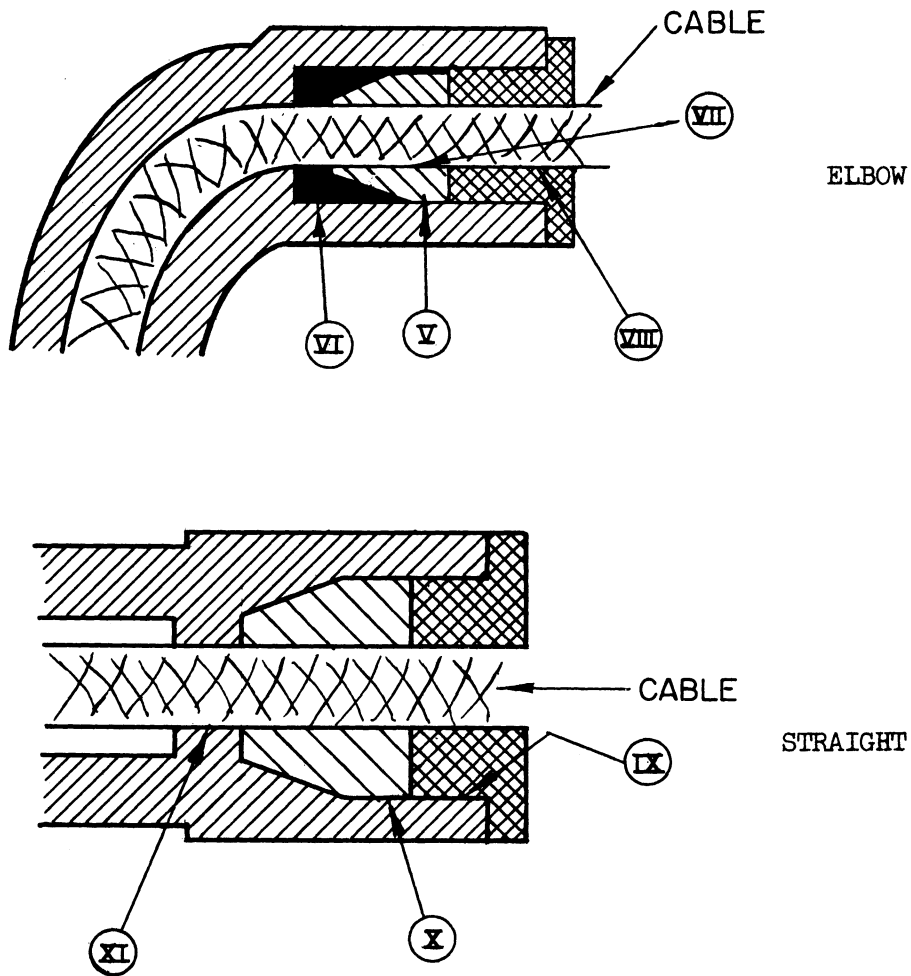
Elbow assembly and straight adaptor. (See Tables V-XI)
